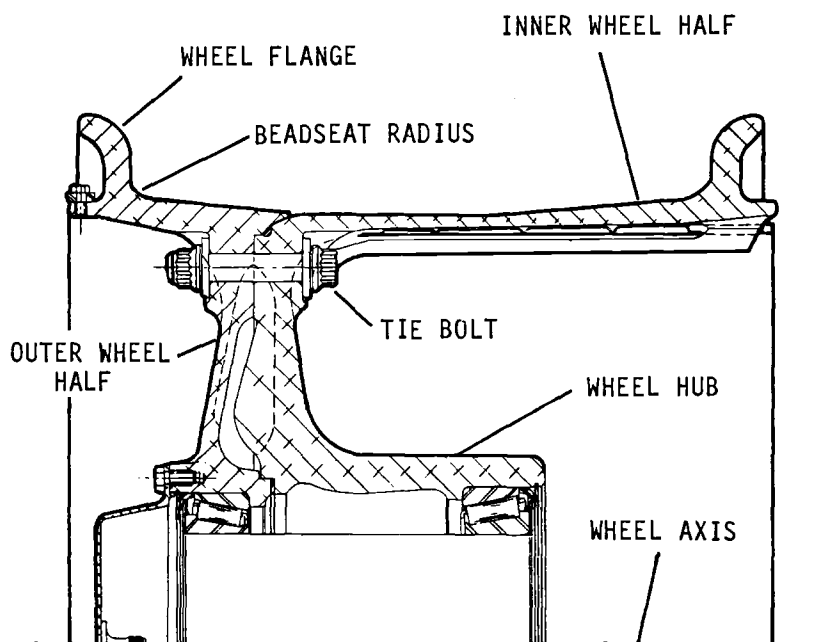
Radial section of an aircraft main landing gear wheel assembly showing location of flange/bead seat radius.
